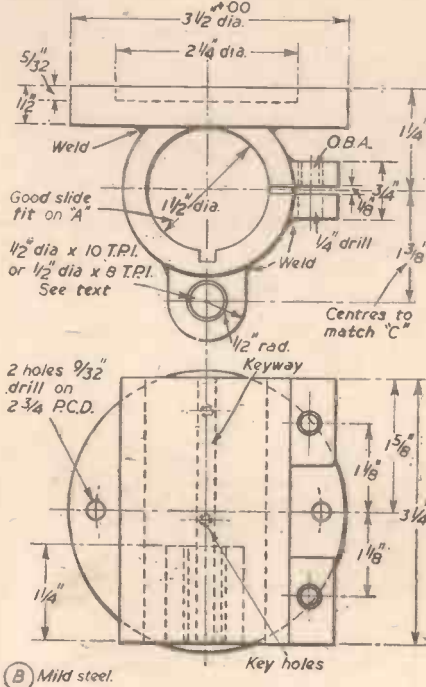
The sliding member. This is a machining drawing. Allow 1/16 inch per face for machining.
